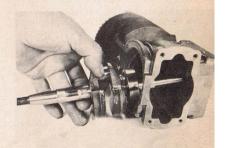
Take care not to damage the seal when removing the crankshaft.
